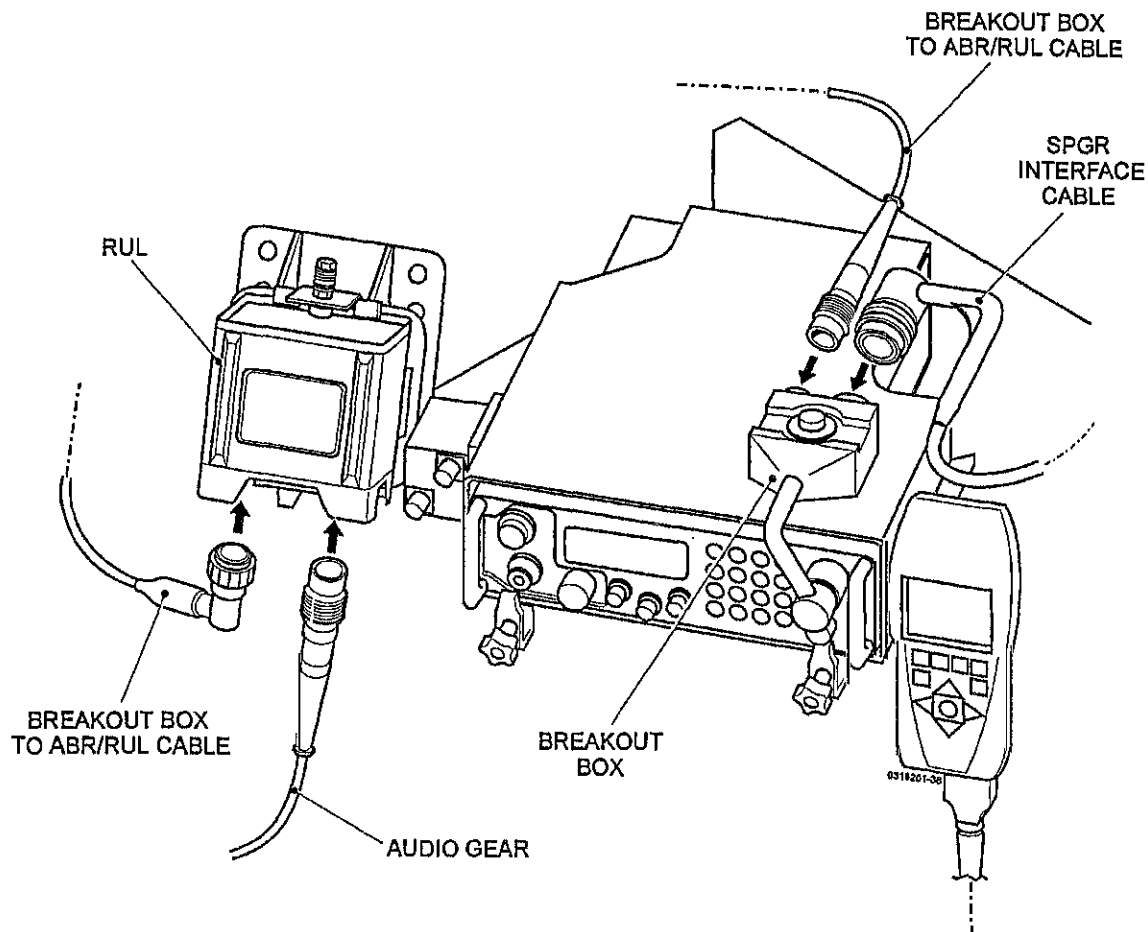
Remote kit cable installation - TUL/TUM mounted manpack station
